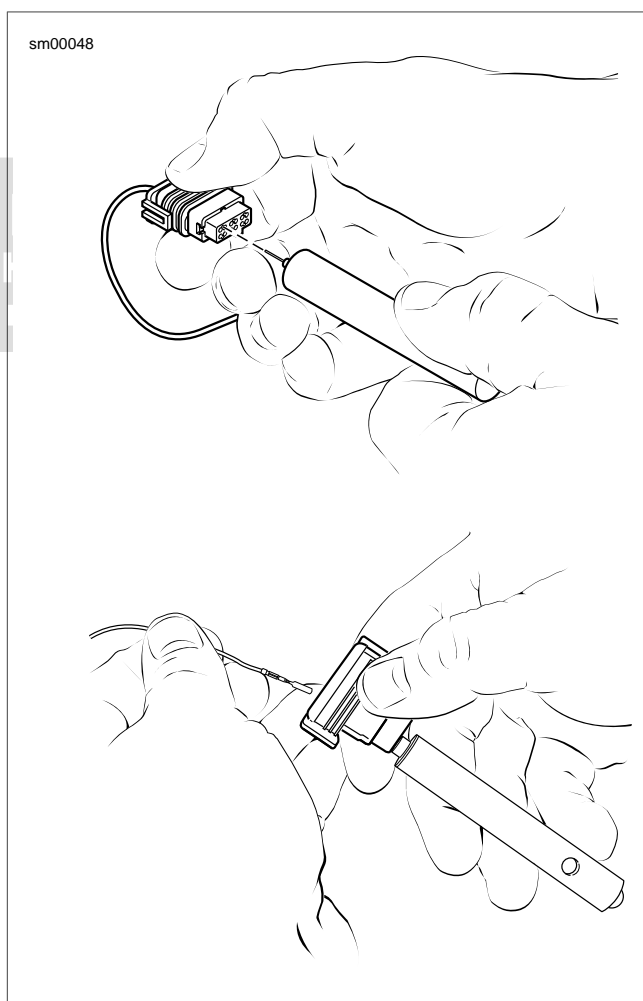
Packard Micro 64 Connector: Insert Tool and Remove Terminal
